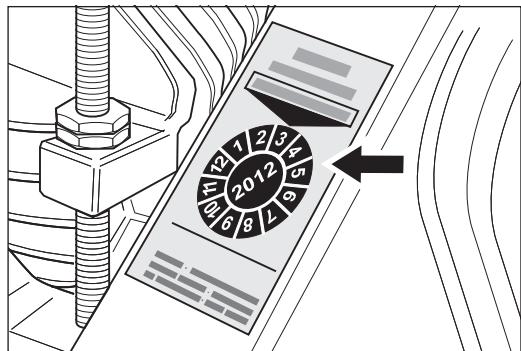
The test seal at the belt guard certified the electrical and mechanical safety of the machine.
